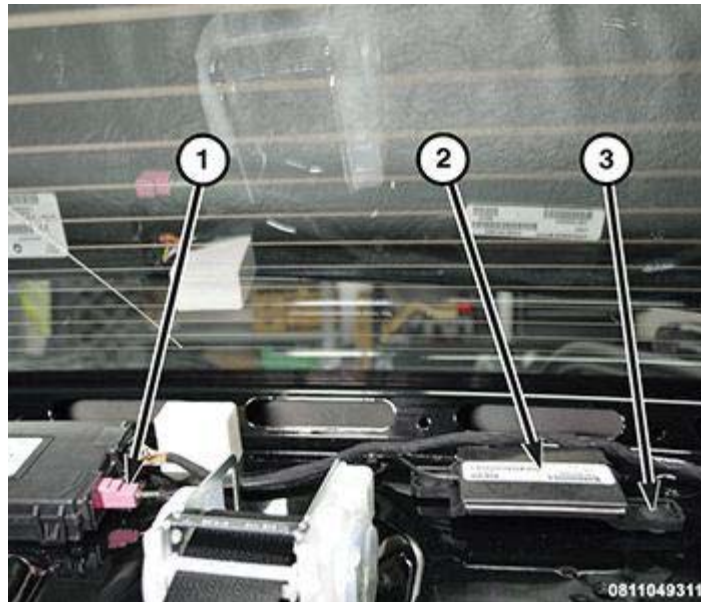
Remote Frequency Hub Module (RFHM) Jump Wire, Remote Start Antenna Module & Push Tab
